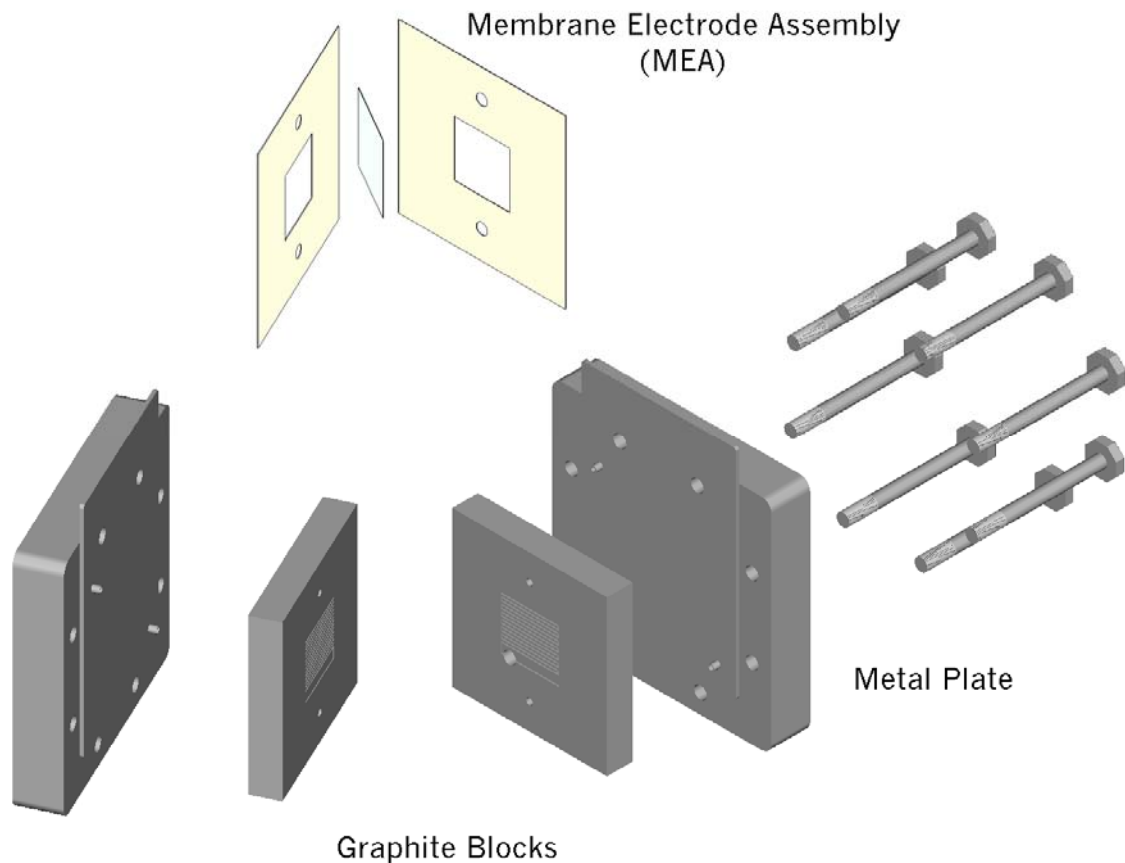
An exploded view of a single cell PEM fuel cell showing graphite blocks with serpentine flow channels, MEA, and metal plates which clamp together the graphite blocks and MEA.
